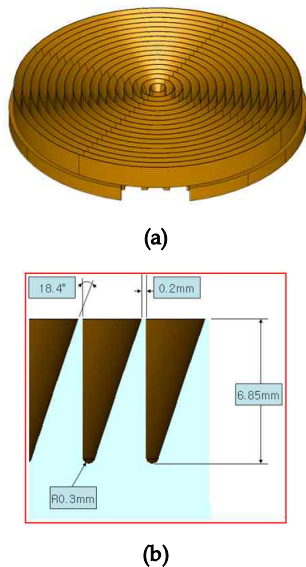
3D View of Black Body Front Side (a) and Dimension of V-Grooves (b)
